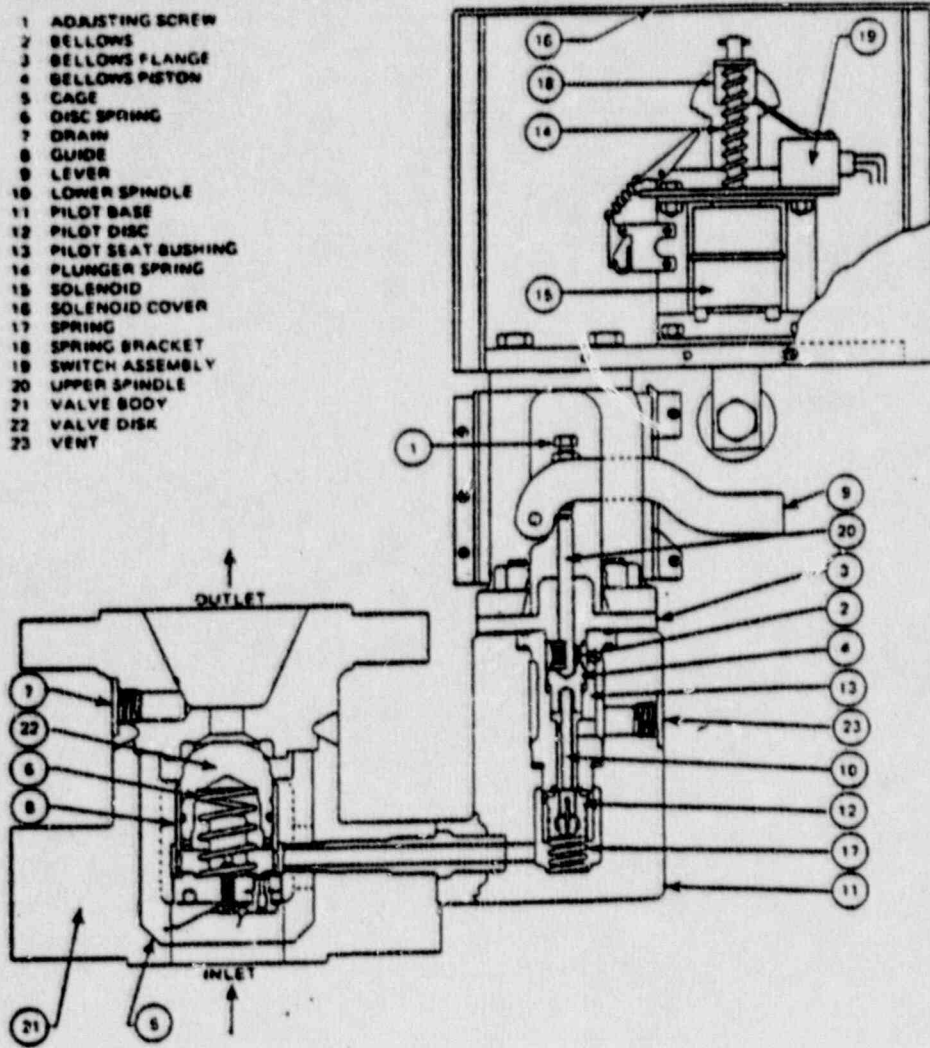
Pilot-operated relief valve (Courtesy of Dresser Industries).
